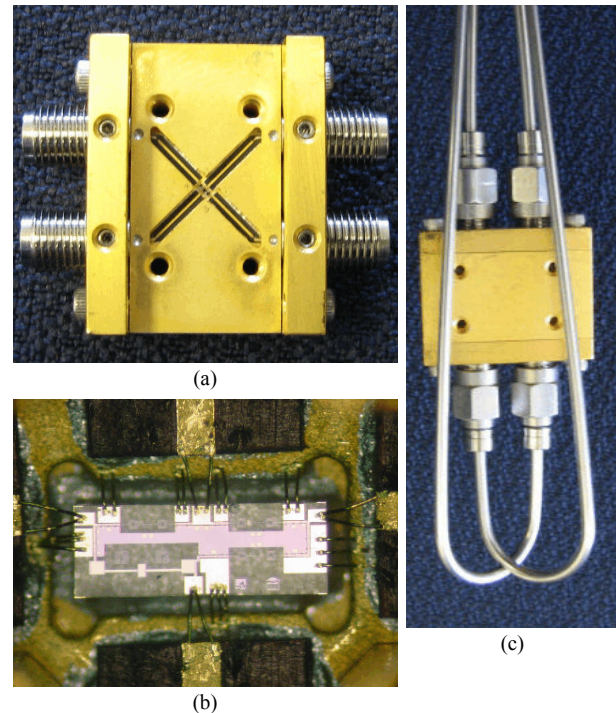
(a) The four-port test fixture. (b) The hybrid chip in the test fixture showing wire bonds to the four microstrip lines and to ground. (c) The test fixture connected to four stainless-steel cables for immersion into a liquid helium storage dewar.
